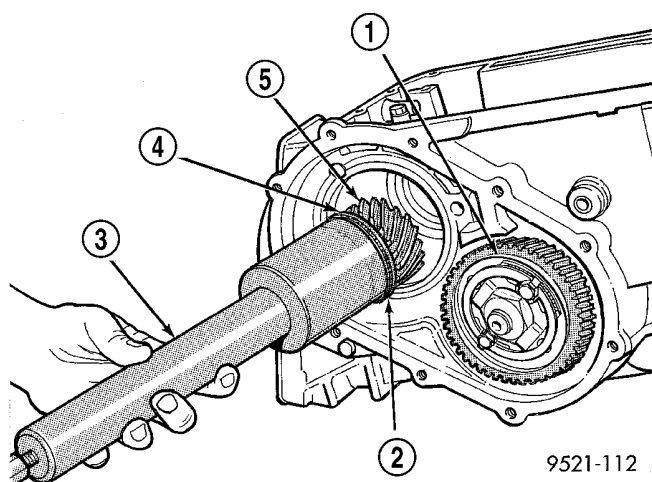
Remove or Install Transfer Shaft and Bearing Retainer Assembly Using Tool L-4512
